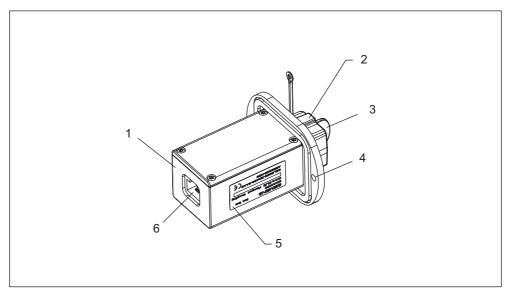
DRIVE-CLiQ Flanged Coupling
